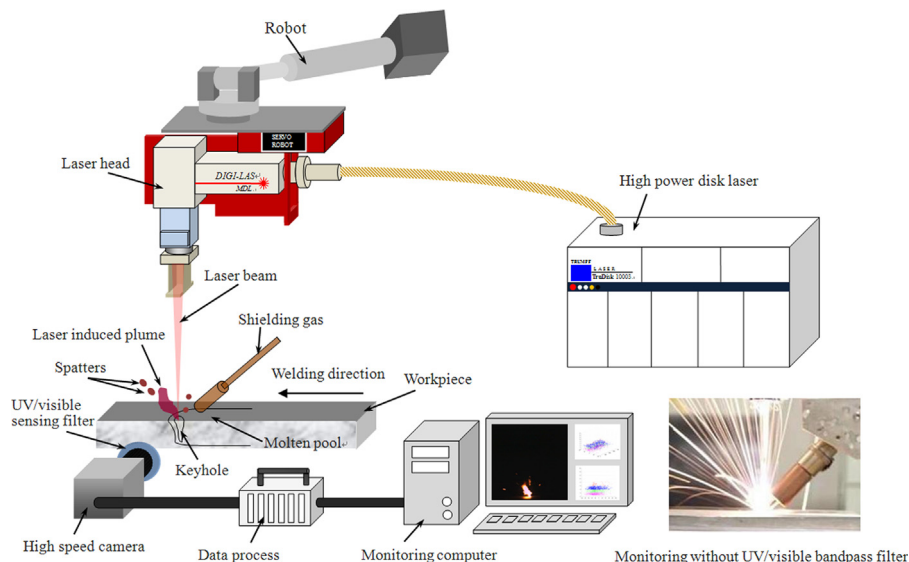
Monitoring system of high-power disk laser welding.
